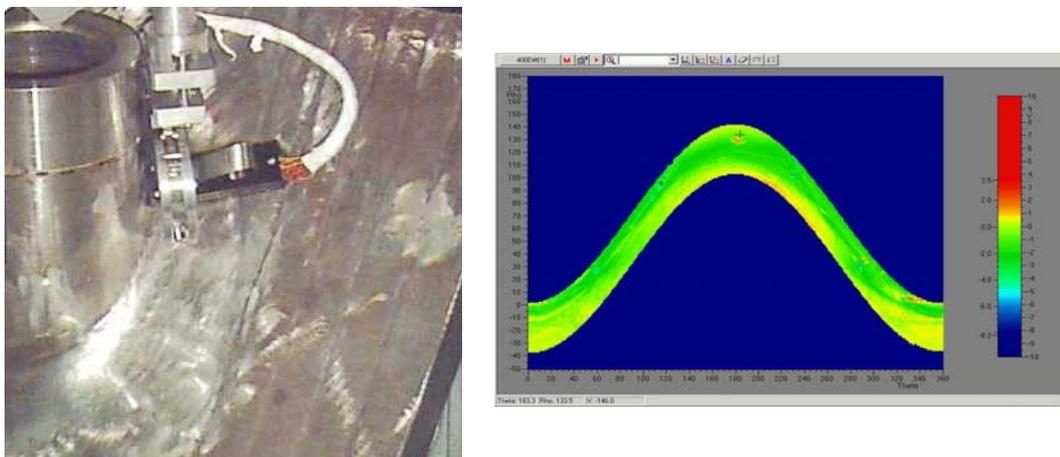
a) Multi-coil element J-Weld Inspection and b) C-Scan Representation data output
